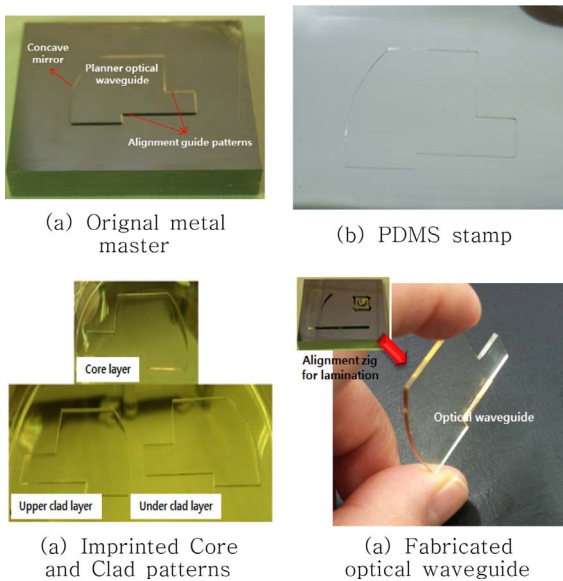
Fabrication of optical waveguide, (a) Original metal master, (b) PDMS stamp, (c) imprinted core and clad layer, (d) fabricated optical waveguide.
